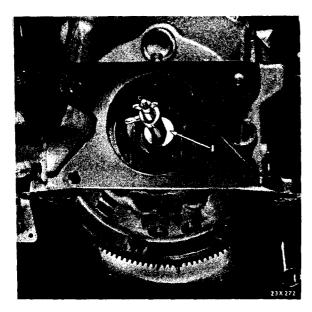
Installation of Clutch Disc (Arbor Tool C-360)
